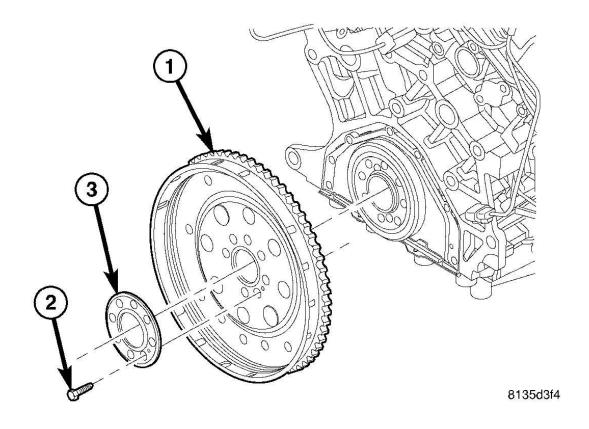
Locating Attaching Bolts, Backing Plate & Flex Plate Courtesy of CHRYSLER LLC
